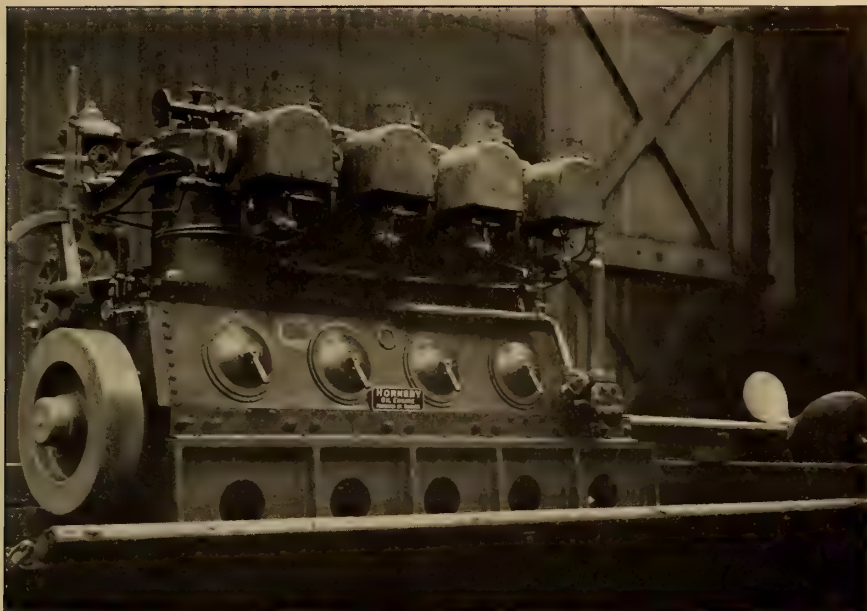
HORNSBY FOUR-CYLINDER REVERSING OIL ENGINE
